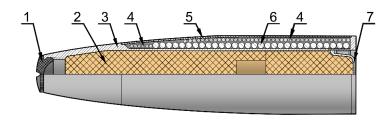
Main parts of the 128 mm HE warhead with a central detonating assembly: (1) fuze well closing plug, (2) explosive charge, (3) warhead body, (4) smaller steel balls, (5) liner, (6) larger steel balls and (7) warhead base
